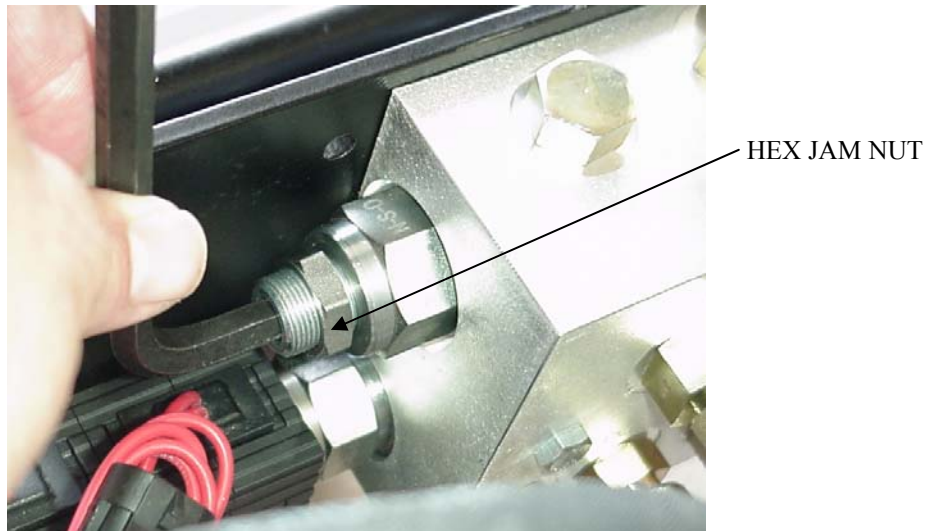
FIG. - ADJUSTING THE FLOW CONTROL VALVE
